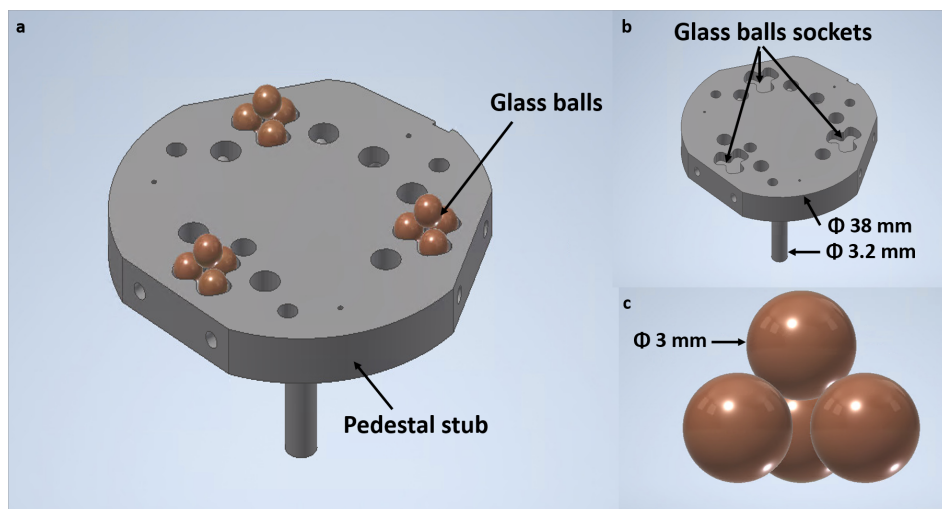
a) CAD drawing of the custom SEM stub (pedestal stub) with the glass balls in tetrahedron configuration mounted on the sockets. b) CAD drawing of the pedestal stub alone, with the 3 sockets to hold the glass balls. c) A close-up drawing of the 4 glass balls in tetrahedron configuration.
